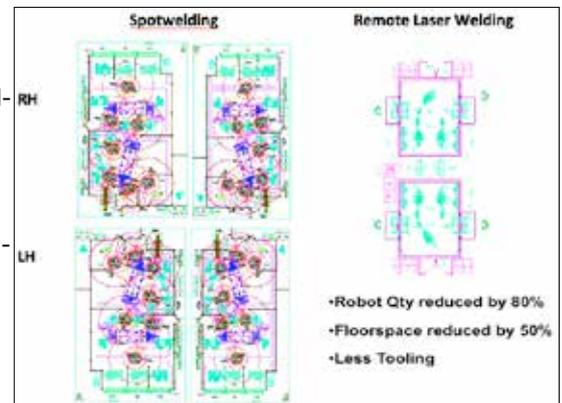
Comparison of layouts for assembly spot welding and remote laser welding.
